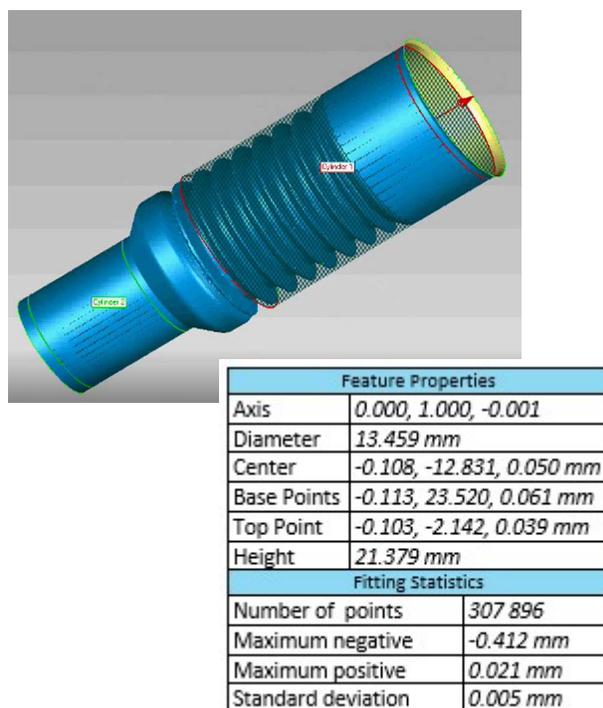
3D map and thread measurements for the inner thread of a turbocharger impeller. The high-precision measurements were calculated from 307,000 3D points acquired in ~4 seconds.
